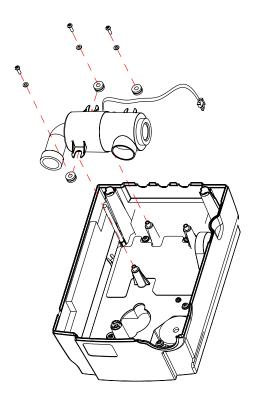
FIGURE N: REMOVAL AND INSTALLATION OF VALVE ASSEMBLY
